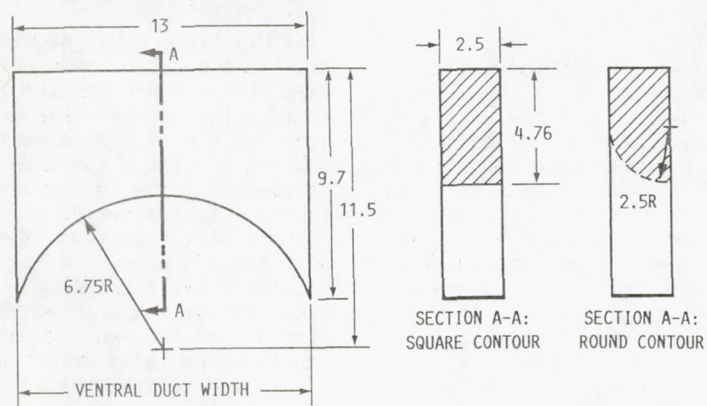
ADAPTER BLOCK. (DIMENSIONS ARE IN INCHES.)
